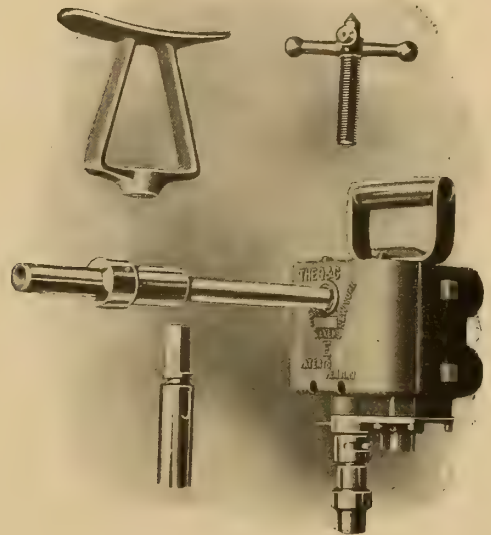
Q. & C. DRILL WITH ATTACHMENTS. RAILWAY APPLIANCES CO.
